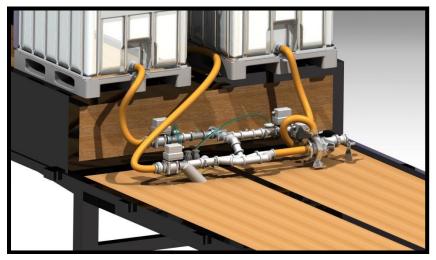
The system should mount to a platform transportable by forklift and can provide a filling point on either side of the trailer.
